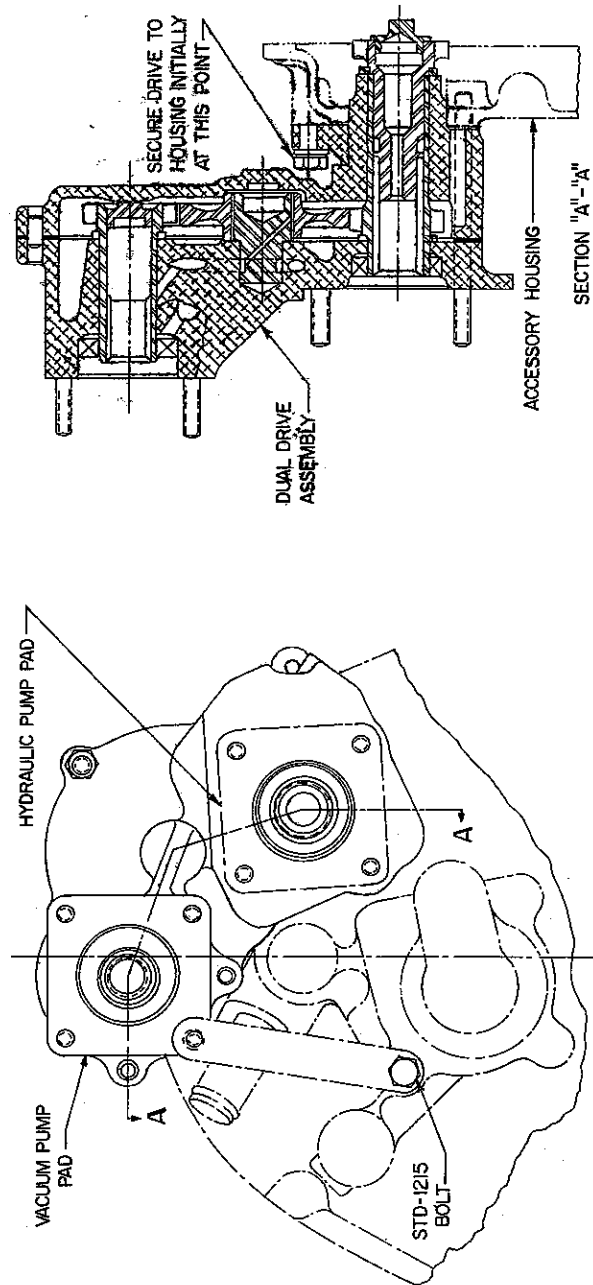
Dual Drive Assembly - Vacuum Pump and Hydraulic Pump
